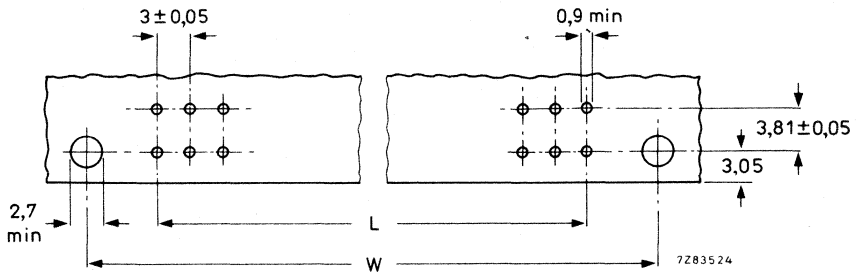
Hole pattern for a male part with 90° angled dip-solder pins.
